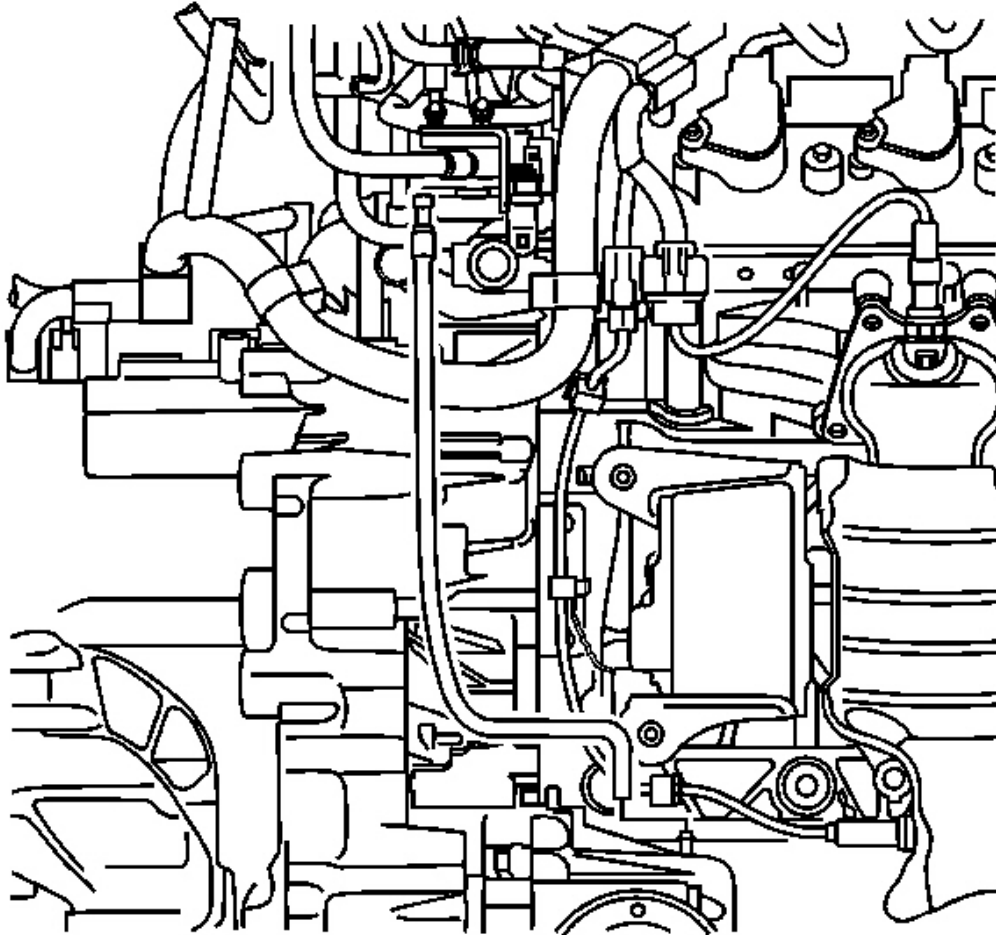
Removing/Installing Vent Hose From The Transfer Case Assembly
